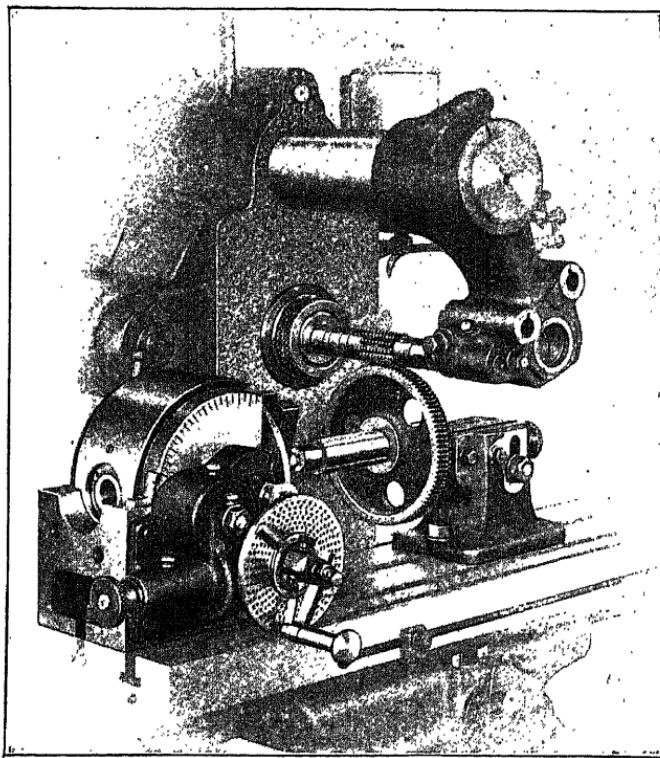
Hobbing a worm gear. Brown & Sharpe Mfg. Co.
